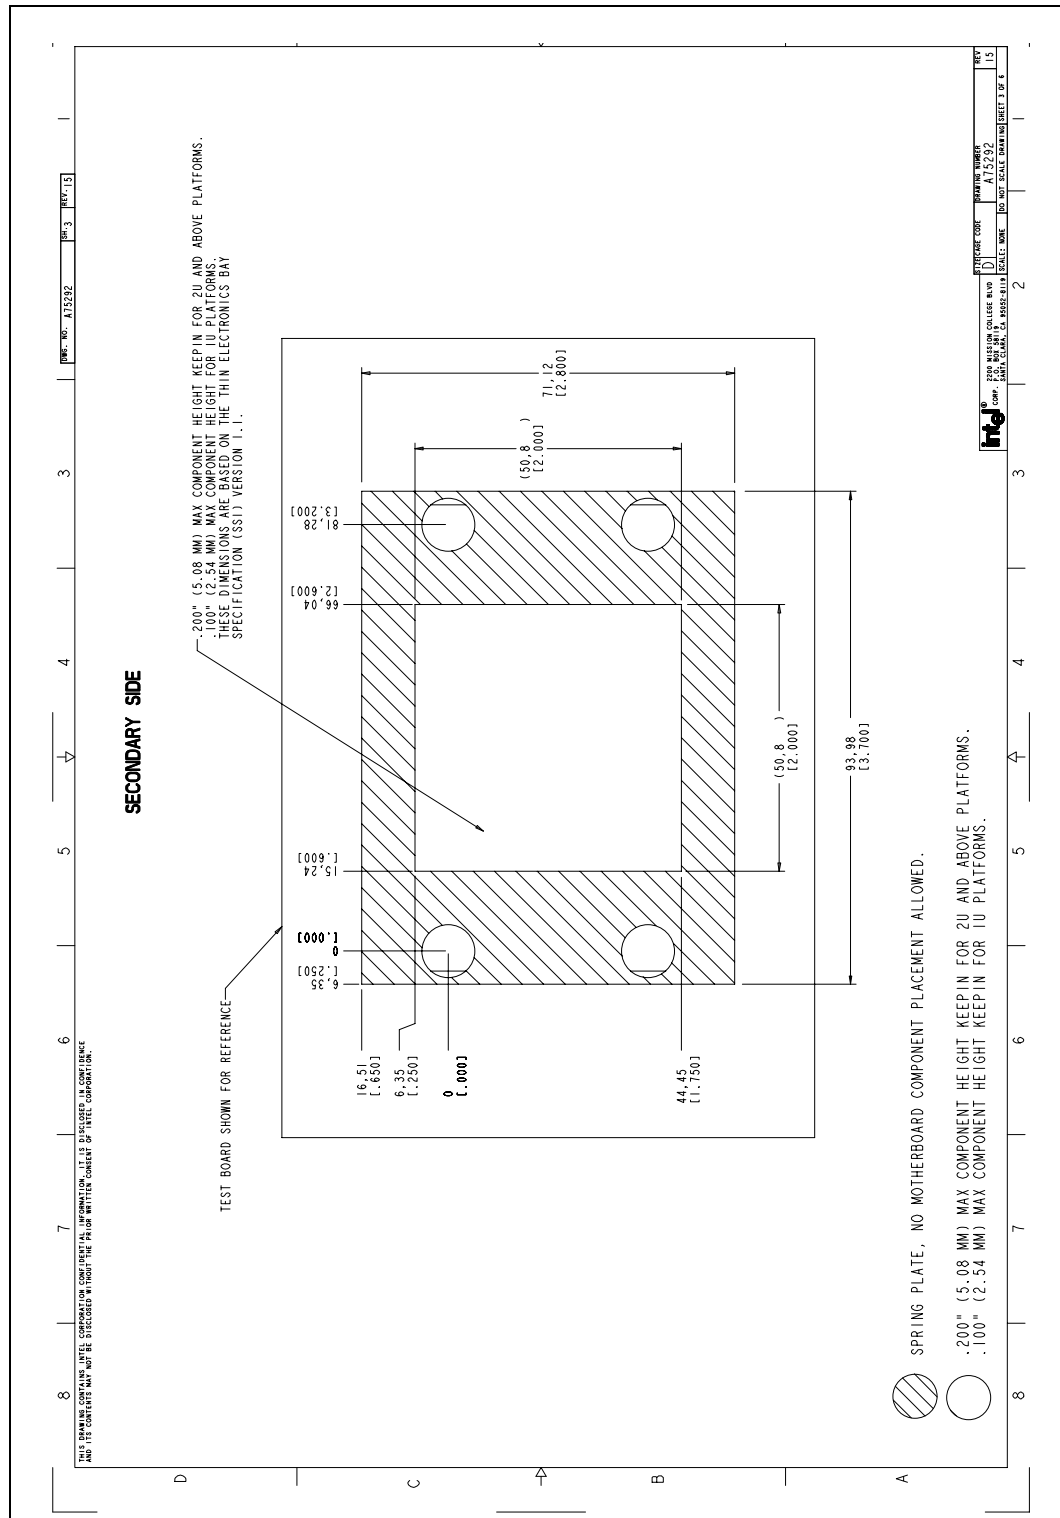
Board Mounting-Hole Keep-Out Zones
